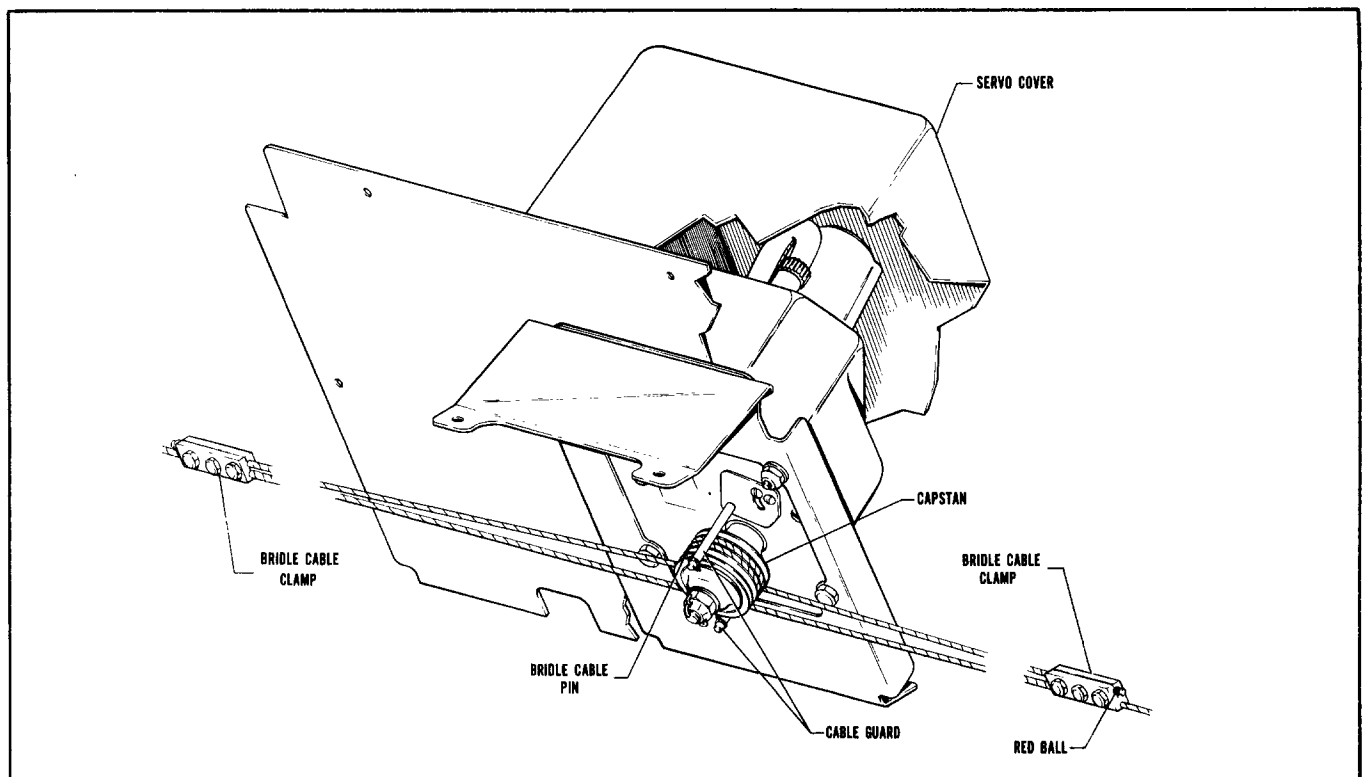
Roll Servo Installation, PA-23-250 (Six Place)
